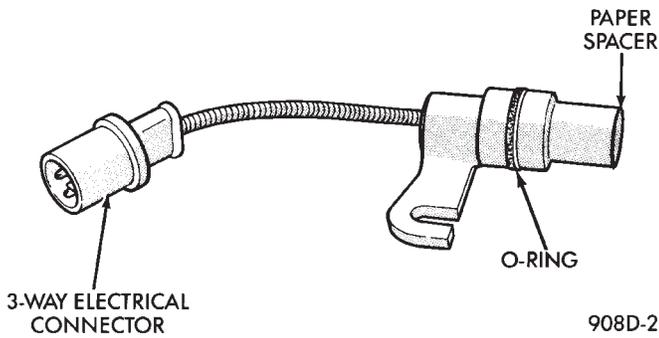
Camshaft Sensor—3.3L and 3.8L Engines
